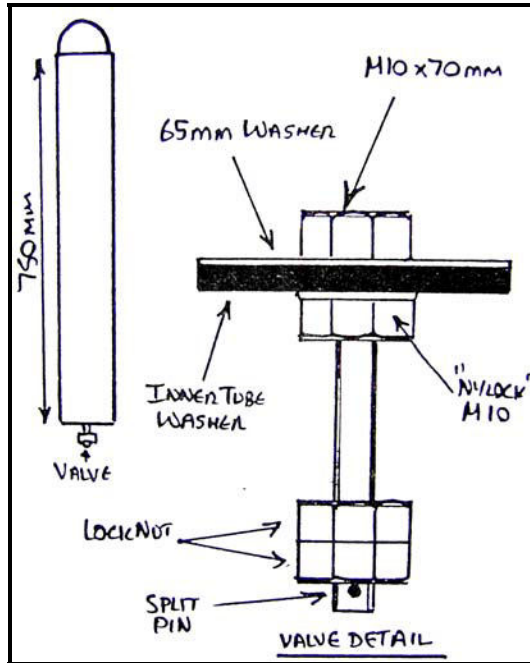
Valve Detail of UFWP Bucket Pump (Deverill et al., 1999b)
